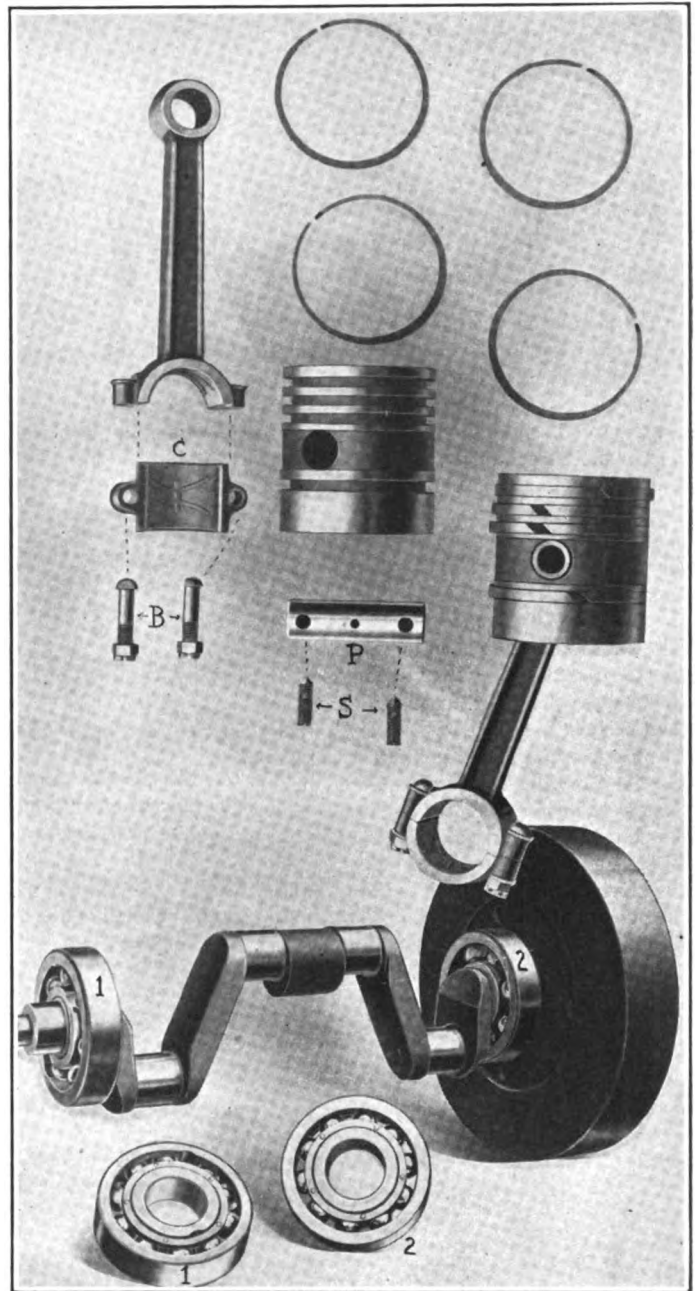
Some of the Krit motor parts. Four rings are used, one below the wrist pin. The main bearings of the crankshaft are carried on two exceptionally large annular ball bearings
